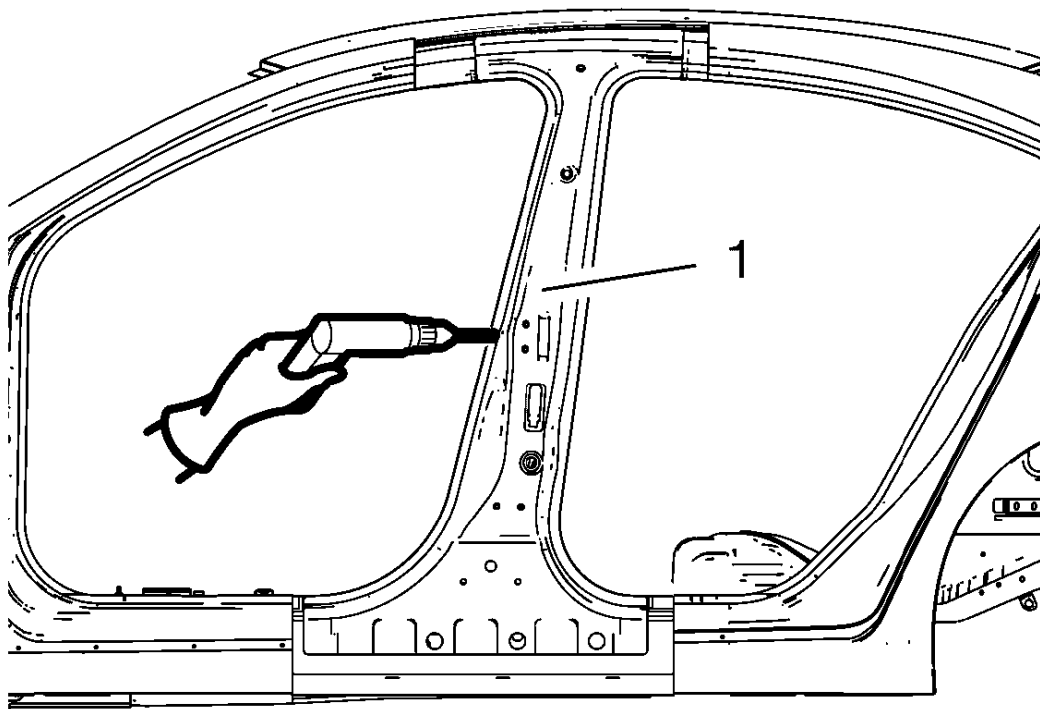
Drilling Factory Welds Of Center Pillar Reinforcement
